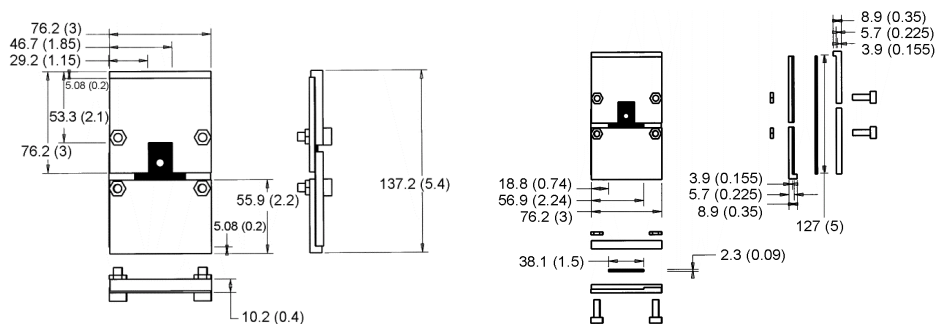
3-view dimensioned drawings of UCSB compression fixture.
